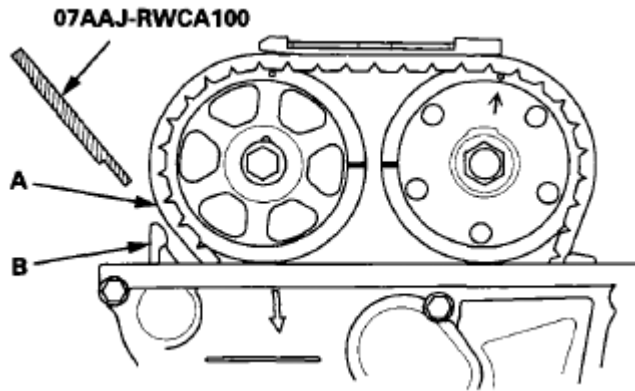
Measuring Clearance Between Cam Chain And Tensioner Arm
